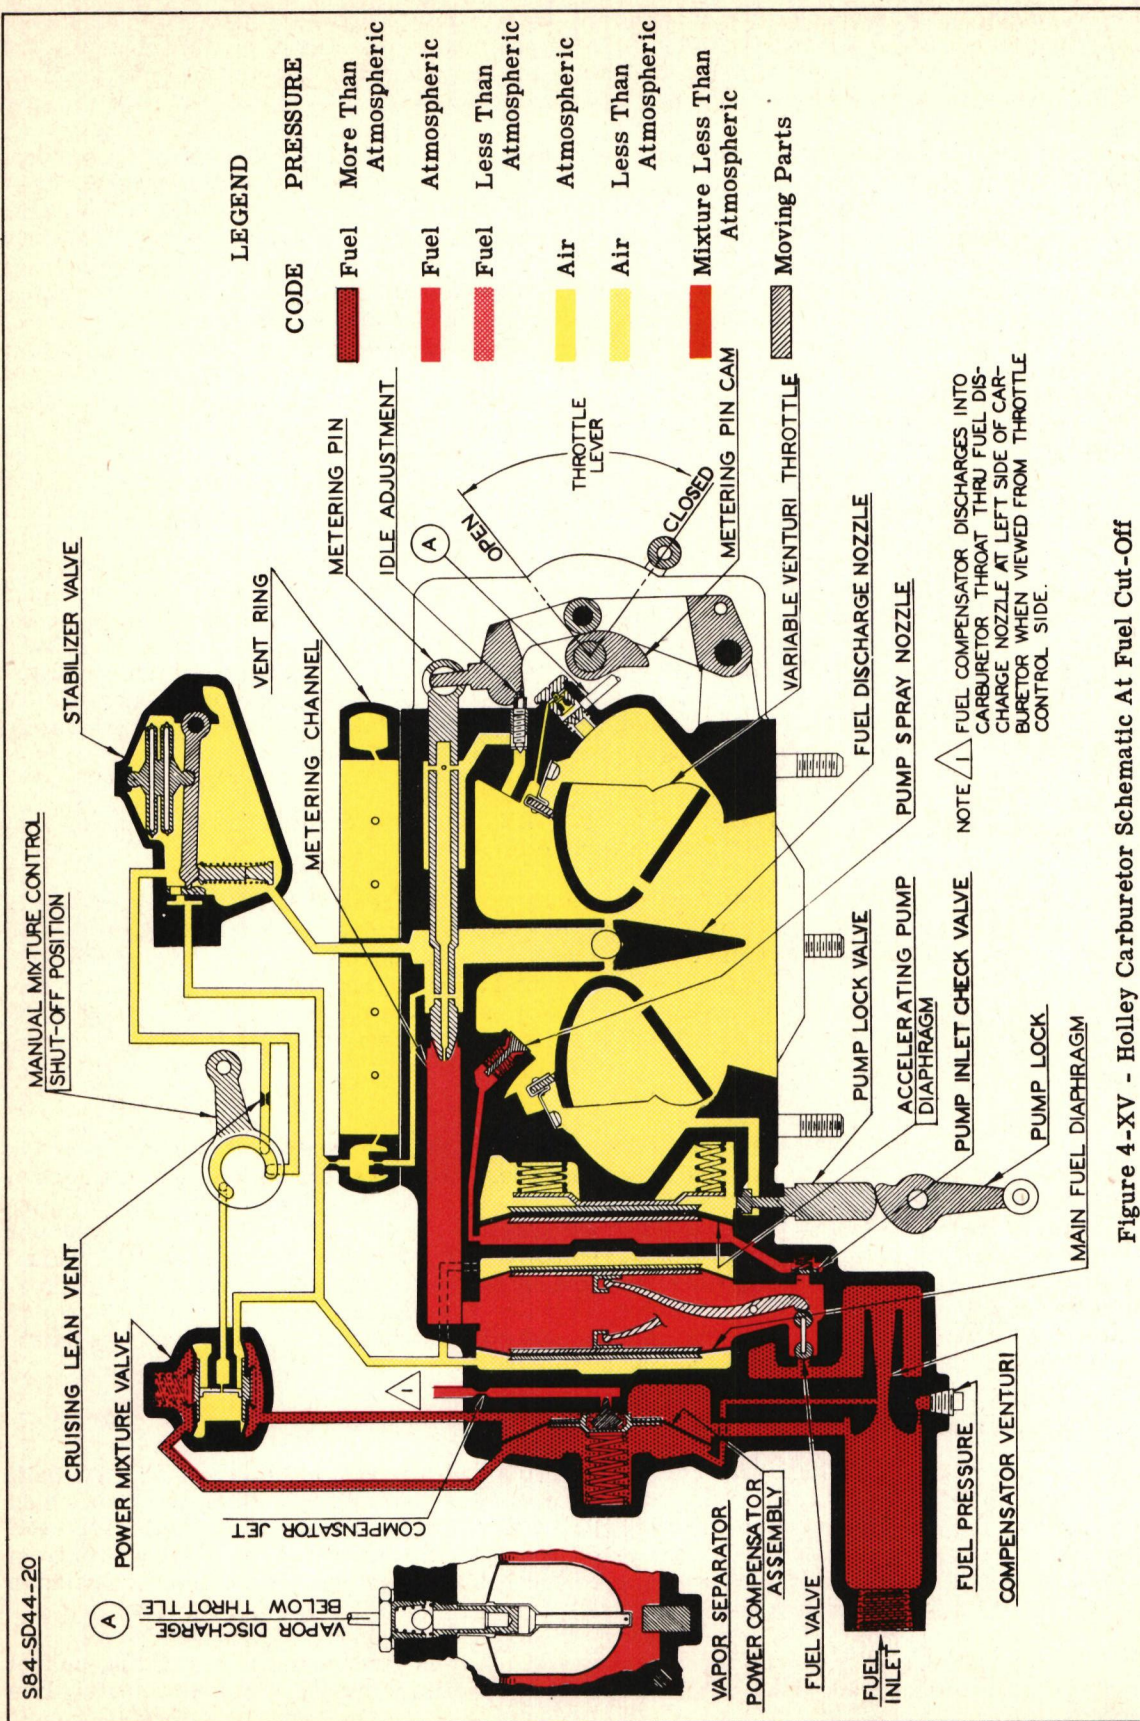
XV - Holley Carburetor Schematic At Fuel Cut-Off
